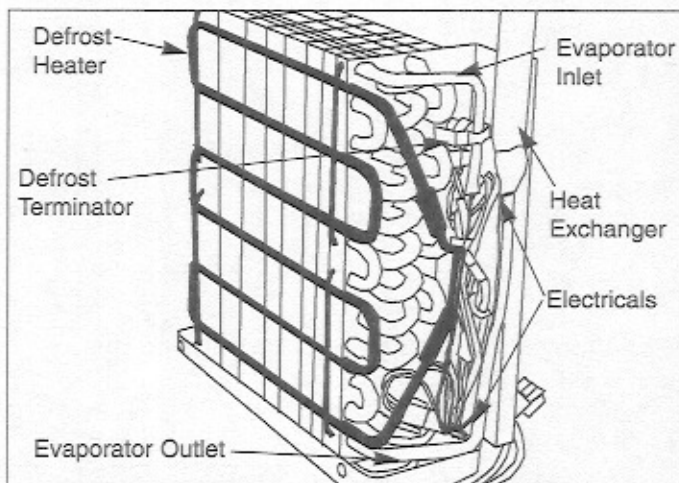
Model 690 Freezer Evaporator (Rear View)
